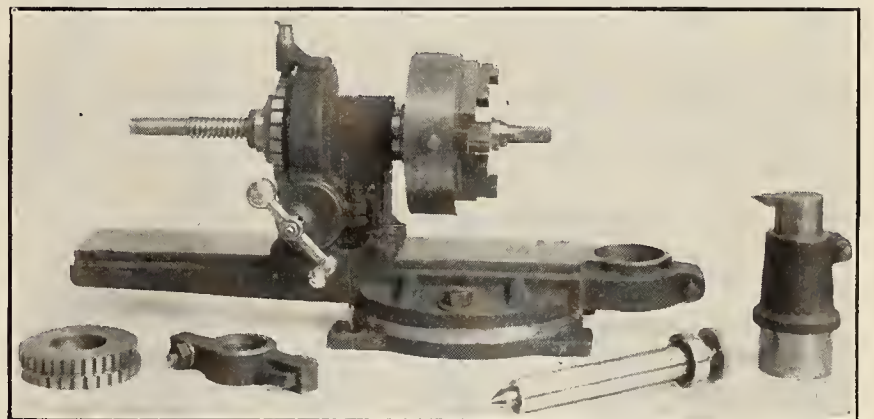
SHOWING QUILL AND SCREW REMOVED, STOCKBRIDGE INDEX CENTER.
